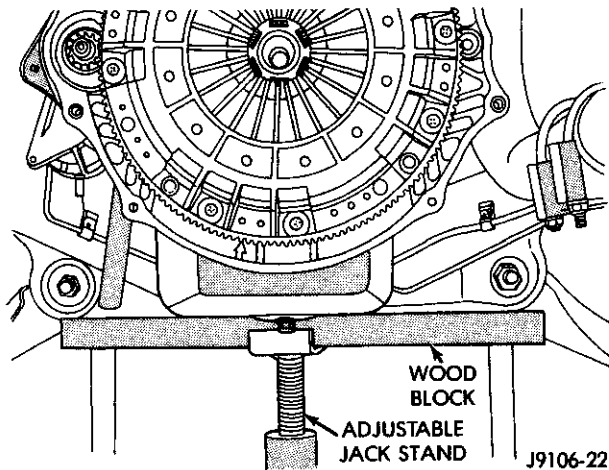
Supporting Engine With Jack Stand And Wood Block—Diesel Model Shown
